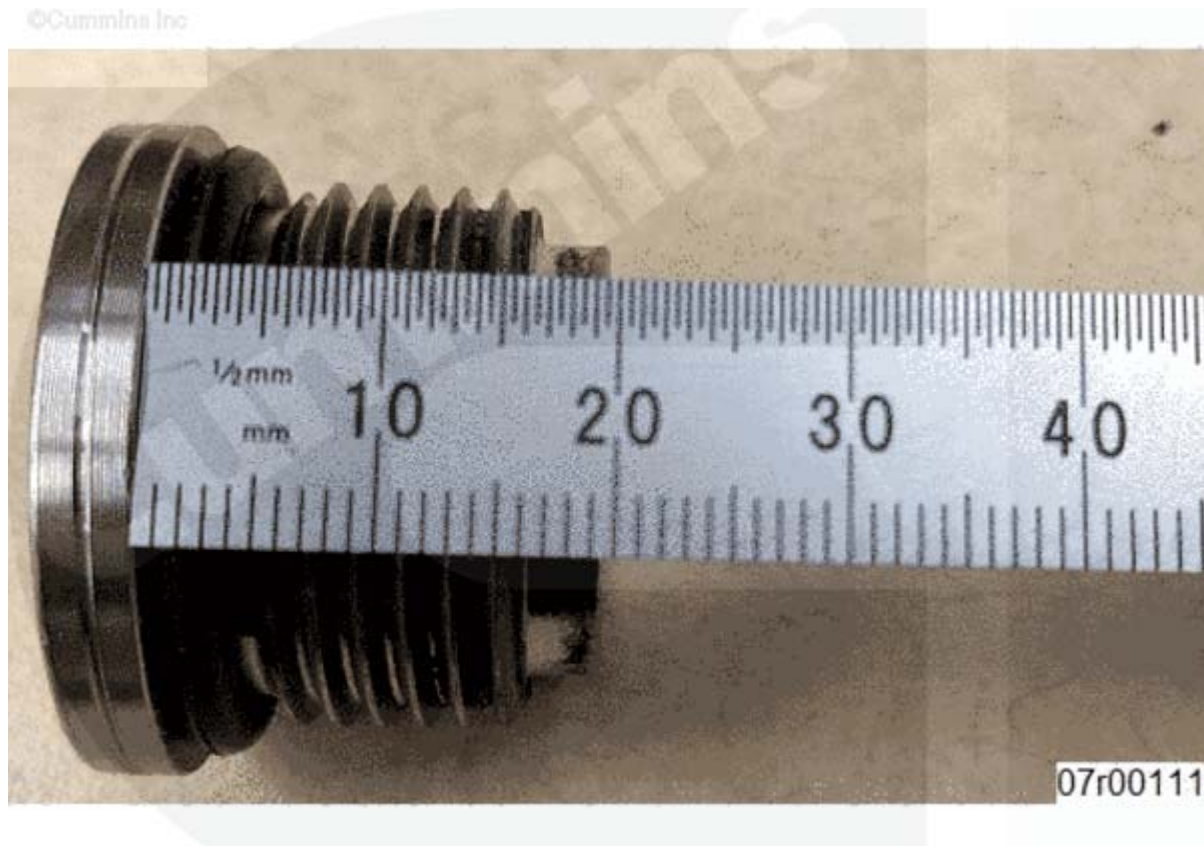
, Measurement of Lubricating Oil Filter Head Threaded Plug.
